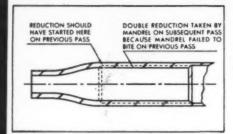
To avoid this condition, maintain a sharp edged chamfer on front end of mandrel nib.
